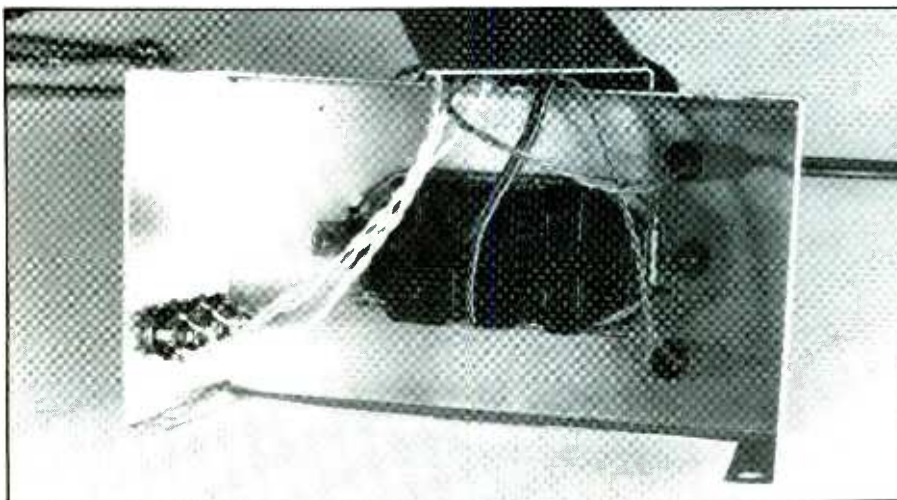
Circuit-board assembly mounted on floor of aluminum utility box using spacers and machine hardware.
